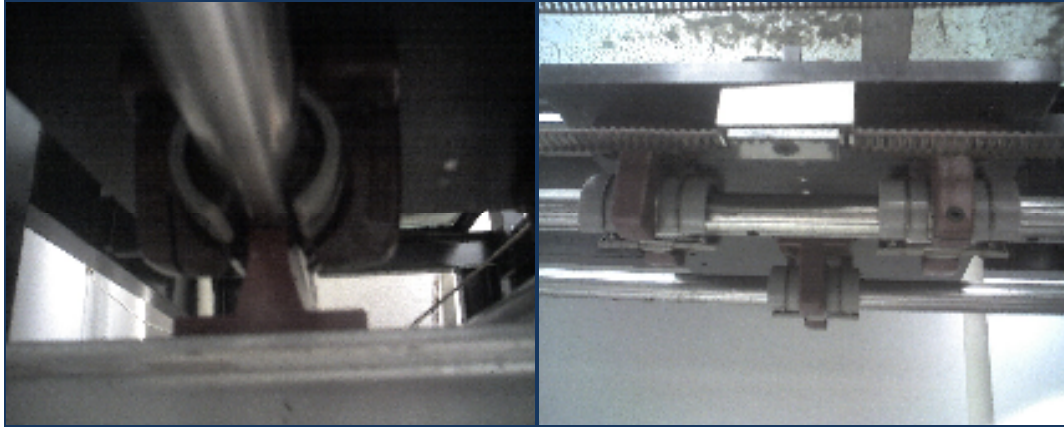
Open linear roller bearings on a supported 1" aluminum rod holding a chain driven mechanism
